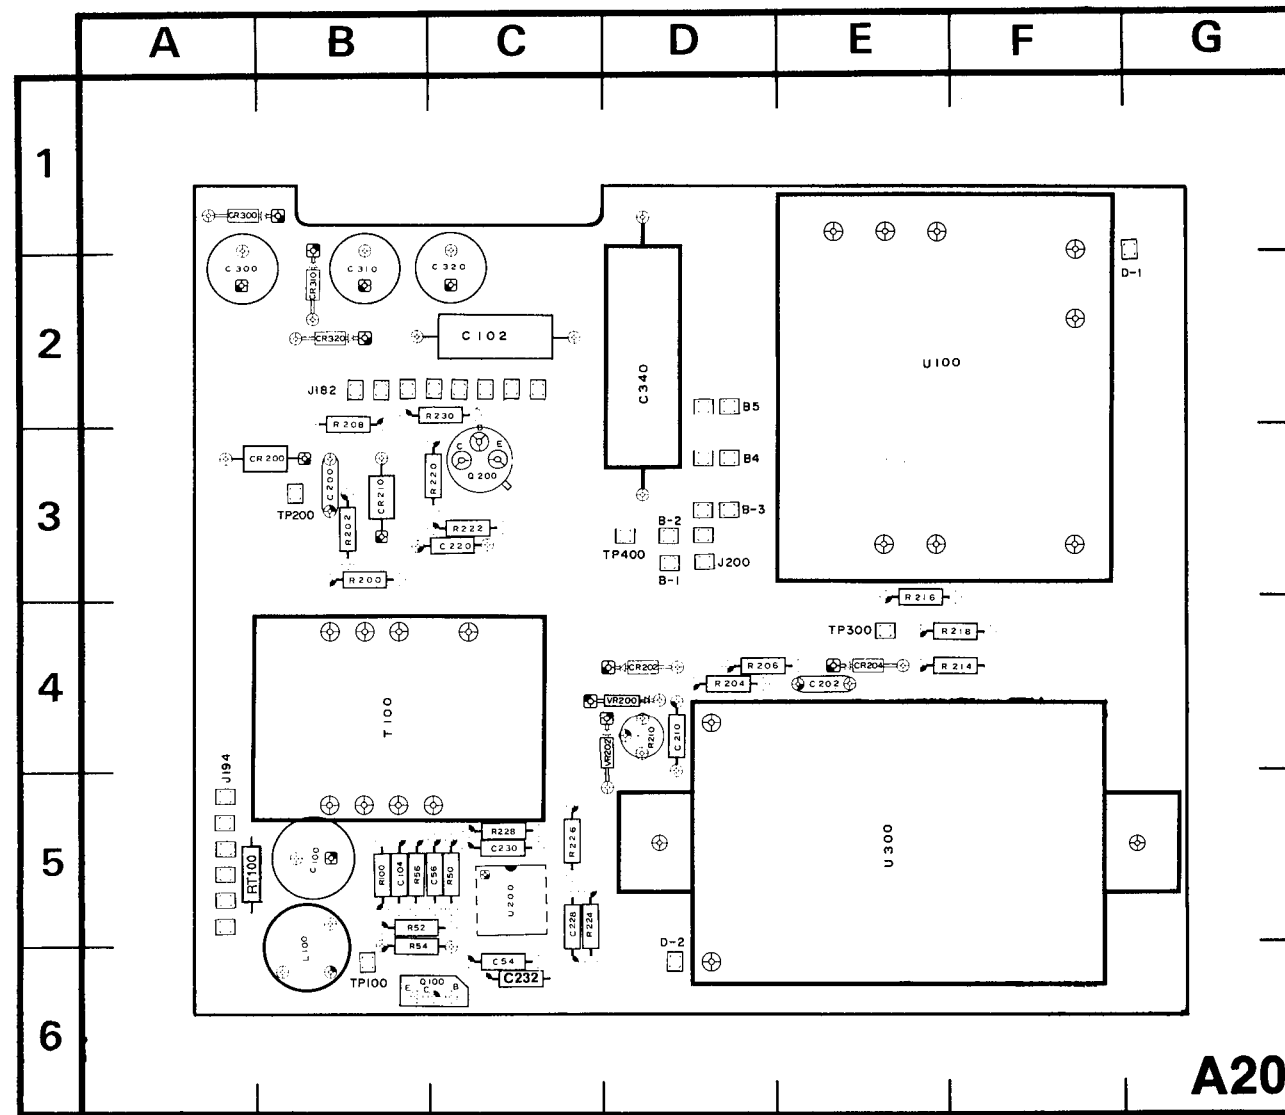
A20—High Voltage Regulator circuit board assembly.
